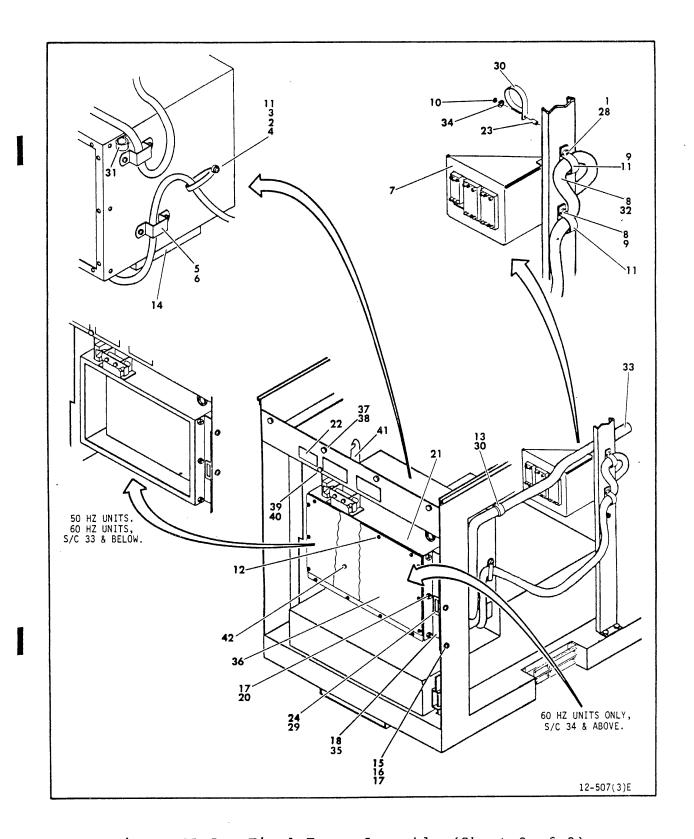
A-5. Final Frame Assembly (Sheet 3 of 3)
